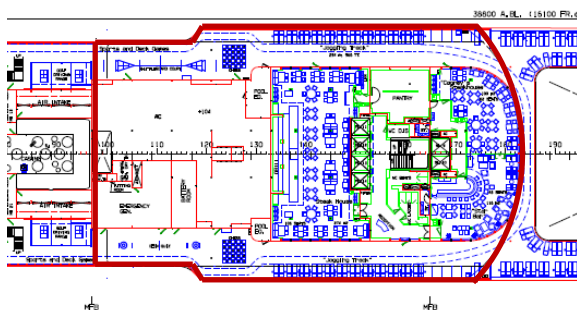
The part of deck 13 to be designed in FRD, comprising two restaurants, a bar surrounded by a jogging track (Plan: Meyer Werft).
